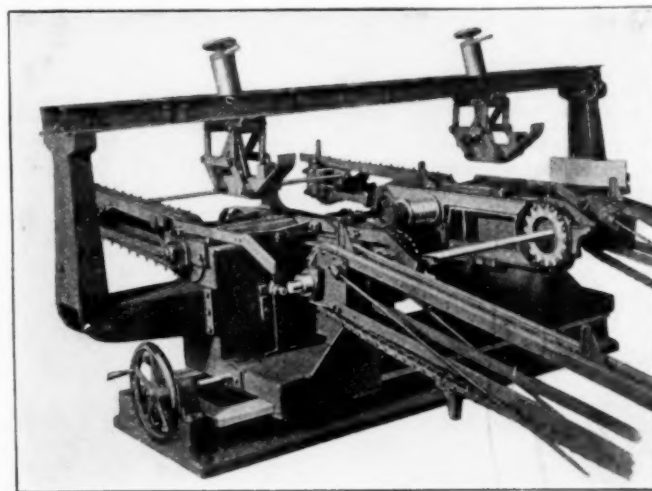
AUTOMATIC TIE-ADZING MACHINE
